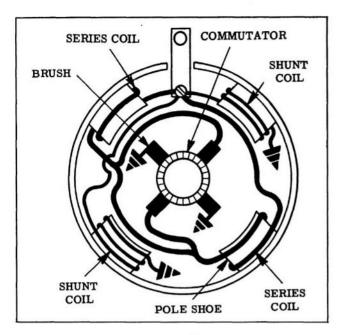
Field Windings (34-35-36-38 & 39 Series with H. C. Engine)
